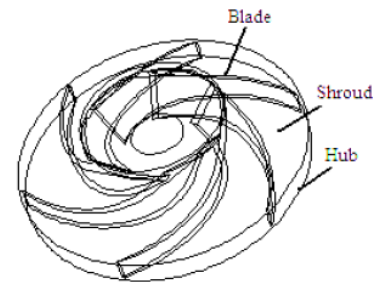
Impeller configuration with blade outlet angle of  $27.5^\circ$
